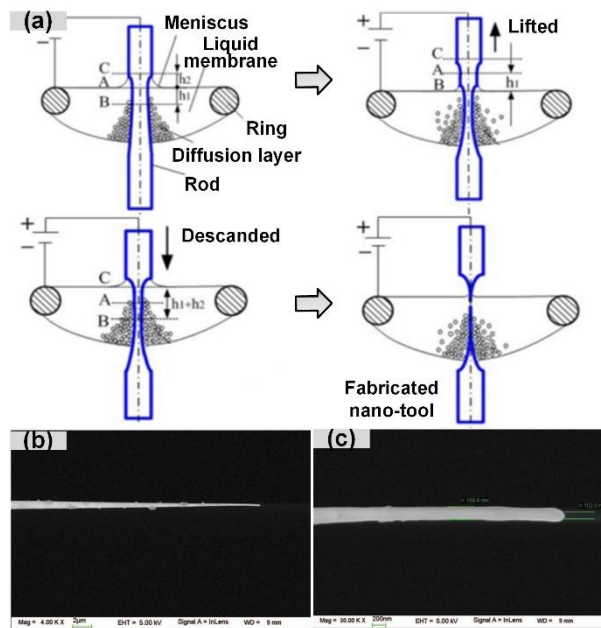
(a) A schematic of the machining process using liquid membrane ECM when the straight reciprocating motion is applied to the tool; (b) Machined high-aspect-ratio sub-micrometer tool; (c) Enlargement of the tool tip (Wang et al., 2013; Zeng et al., 2013).
